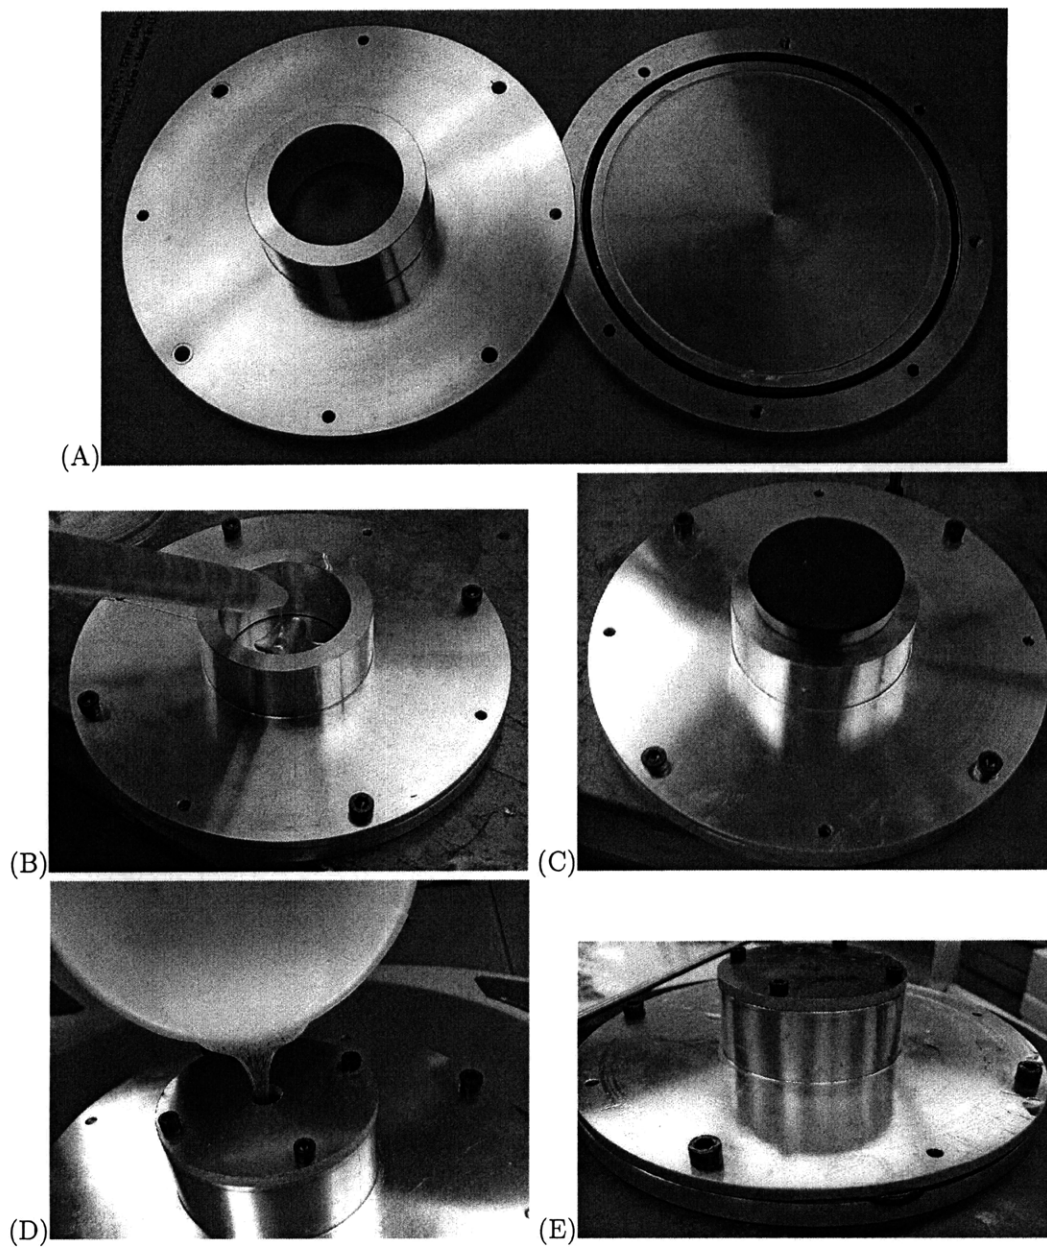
(A) First version of circular discs made for centrifugal casting. (B) Static mixer dispensing PDMS into mold assembly. (C) Rubber stopper inserted into rotor assembly. (D) PDMS being poured into modified assembly with cap. (E) Mold assembly with protruding o-ring.
